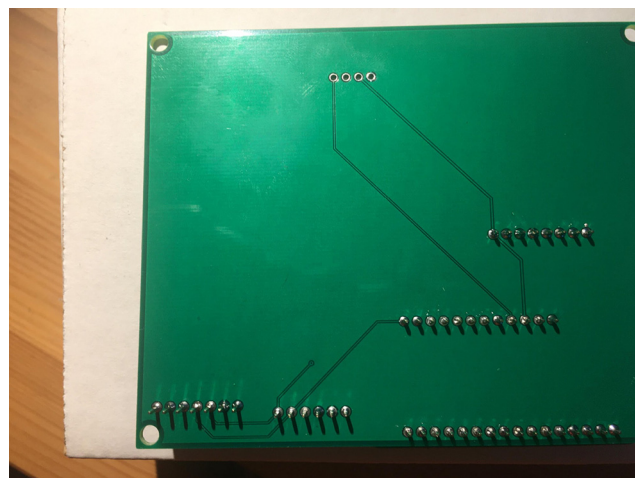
Bottom view after soldering the PowerBoost to the PCB.
